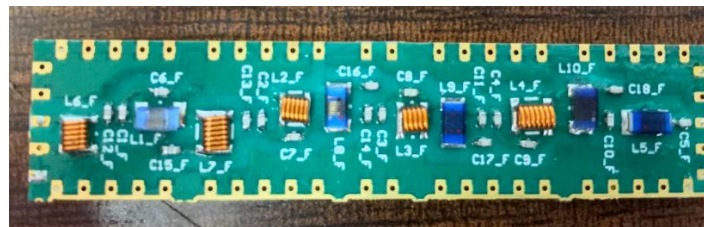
IF Filter Assembled on a Surface Mount PCB
